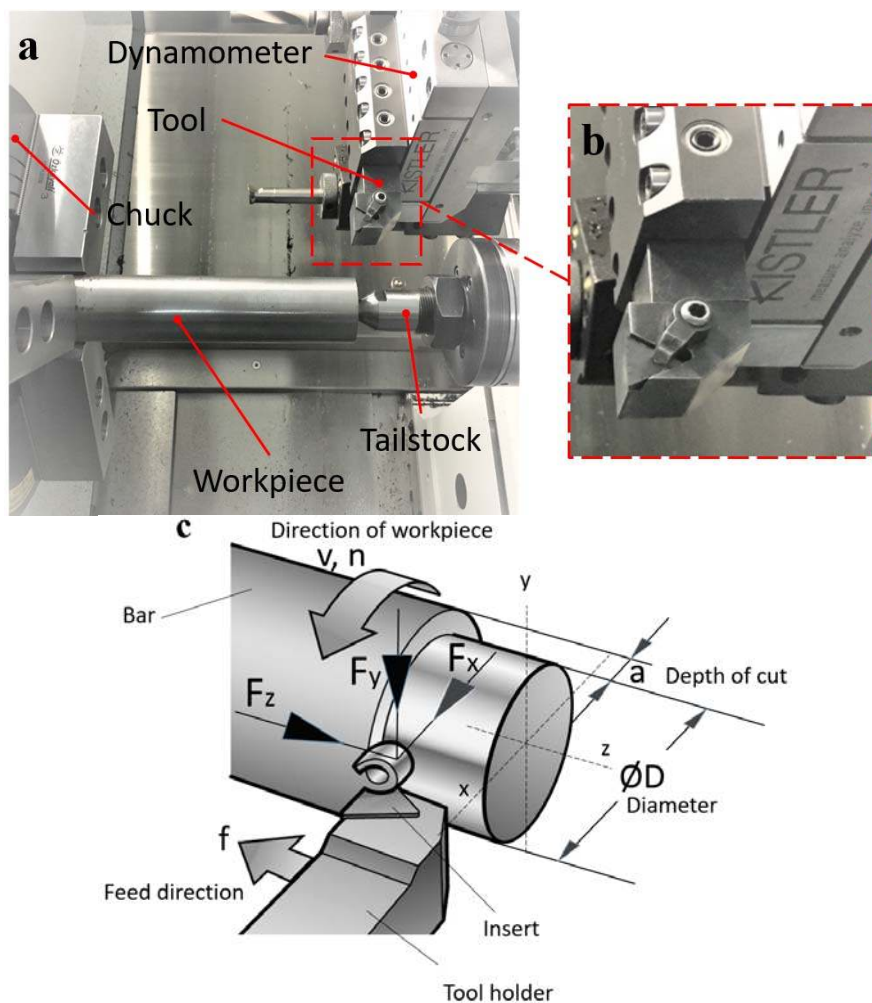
Turning process of cylindrical bar specimens; a) Experimental setup, b) Close-up, c) Depicted schema
